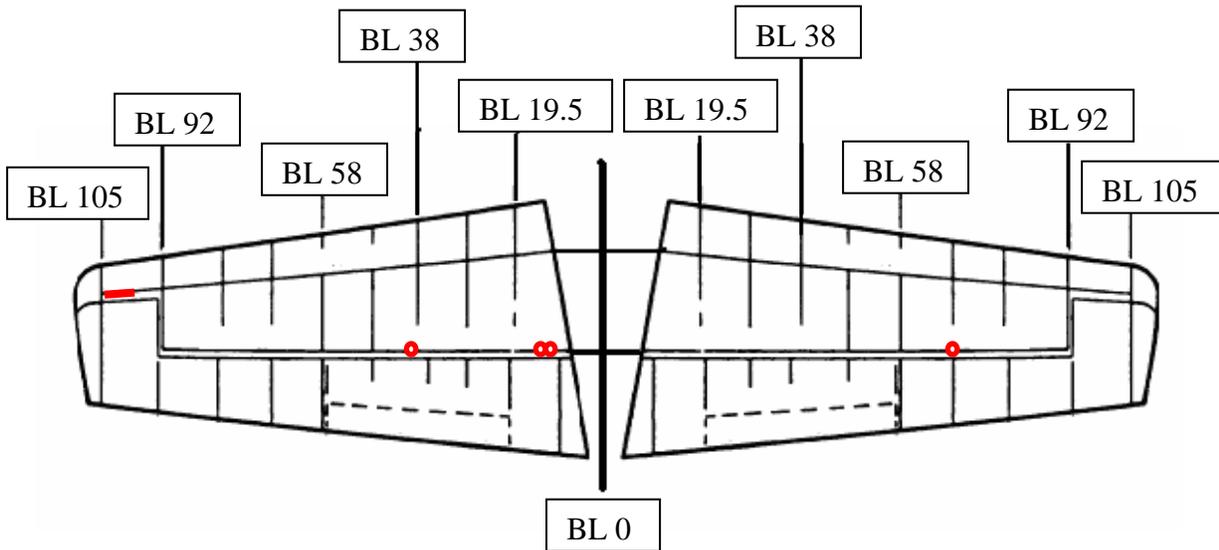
Horizontal Stabilizer Lower Surface NDI Indications
